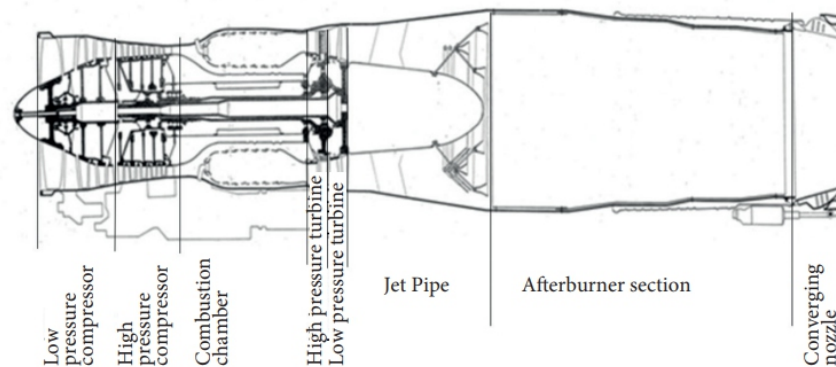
Section view of the turbojet engine showing major turbomachinery components.
